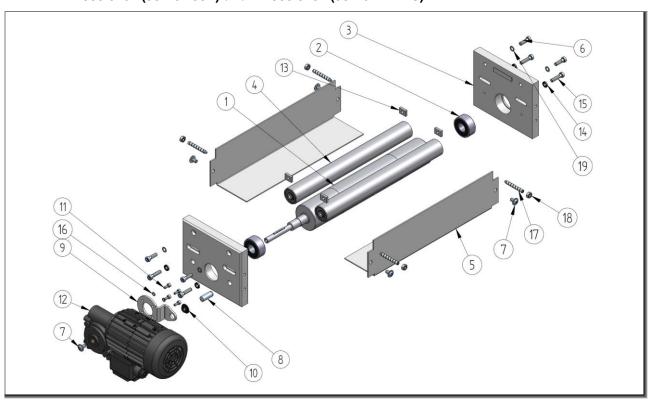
Parts list: Flange drive unit - drive unit/motor unit - position of drive unit 56 - ZZ.900.0161
